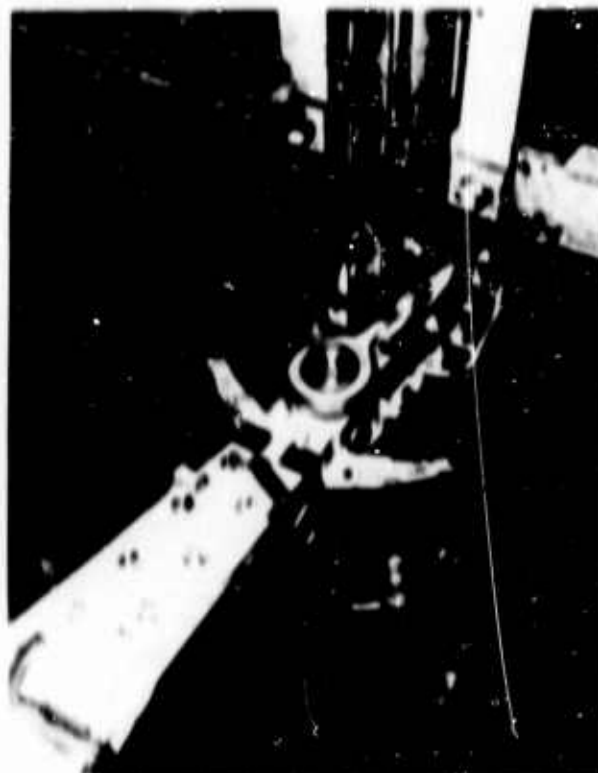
Close-up of Typical Blade Root-End and Blade Grip Installed into Rotor Hub
